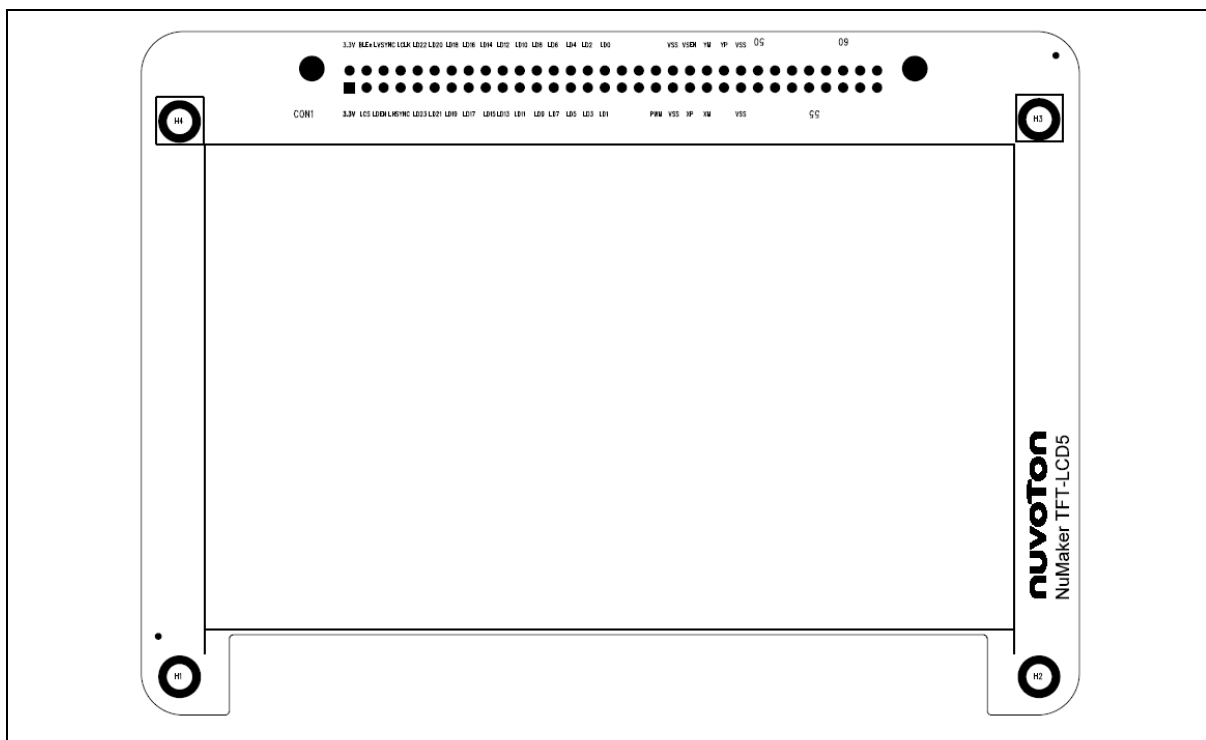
NuDesign-TFT-LCD5 PCB Placement (Front View)
